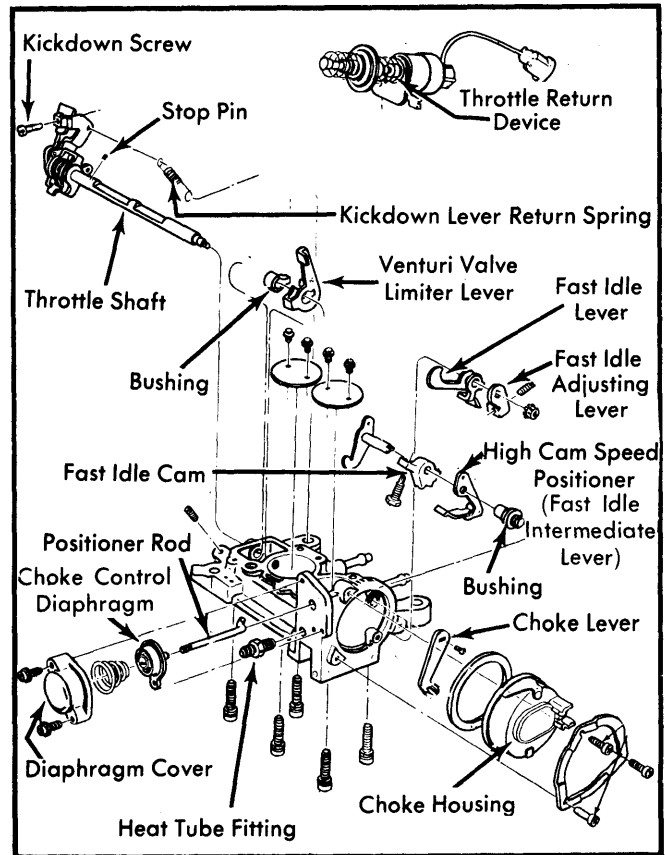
Exploded View of Model 2700 and 7200 Carburetor Throttle Body
